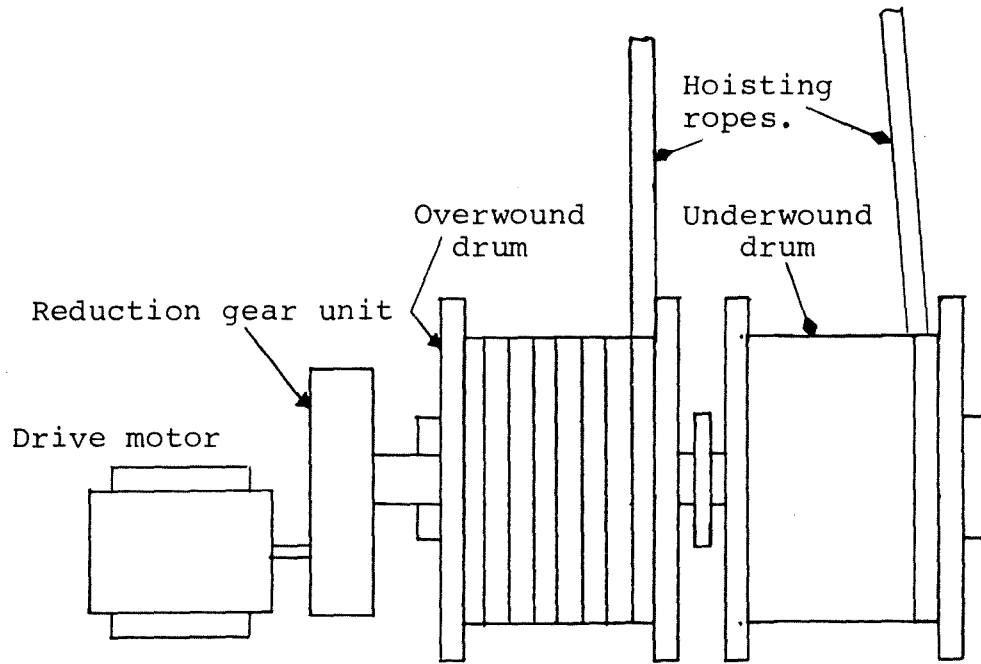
Double cylindrical drum - double rope. Top view.
